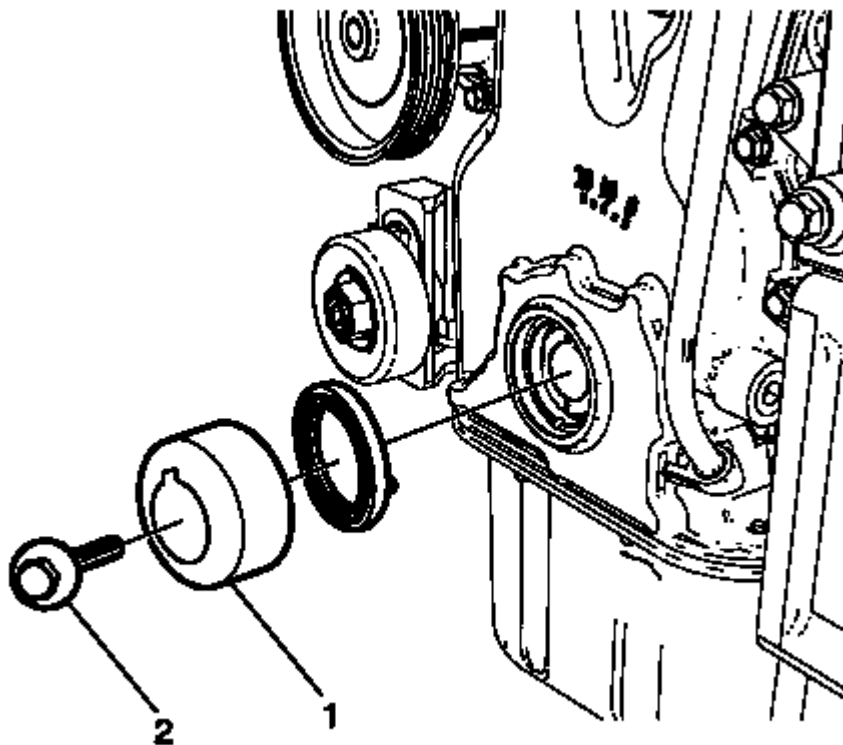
Crankshaft Bolt And Crankshaft Front Oil Seal Installer
